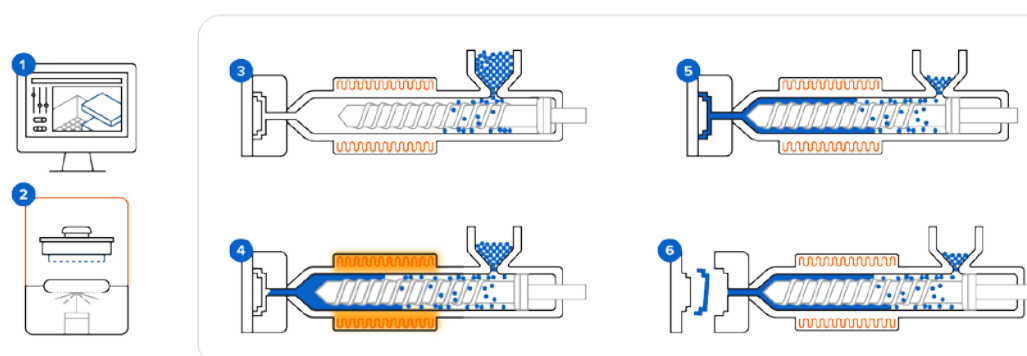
Workflow of injection molding process with 3D-printed molds: 1—mold design; 2—mold 3D printing; 3—mold clamping; 4—injection; 5—cooling; 6—demolding (image reproduced with Formlabs’ permission [73]).
